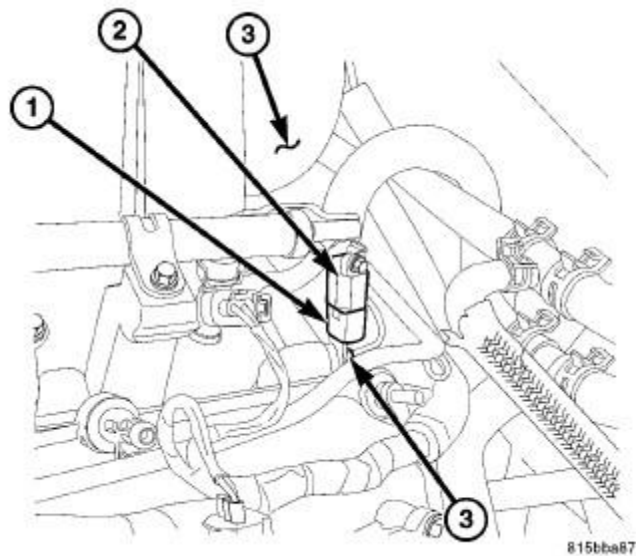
Ignition Capacitor, Electrical Connector & Intake Manifold
